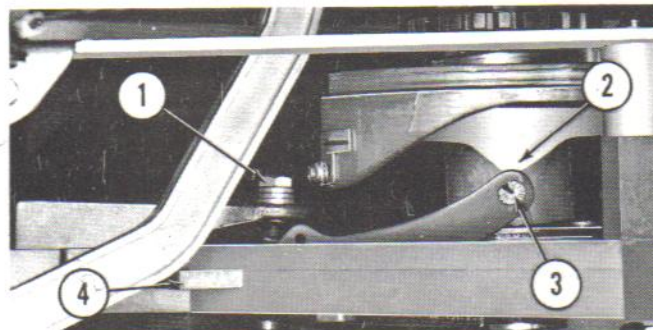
CANCEL ARM ADJUSTMENT - 2504
